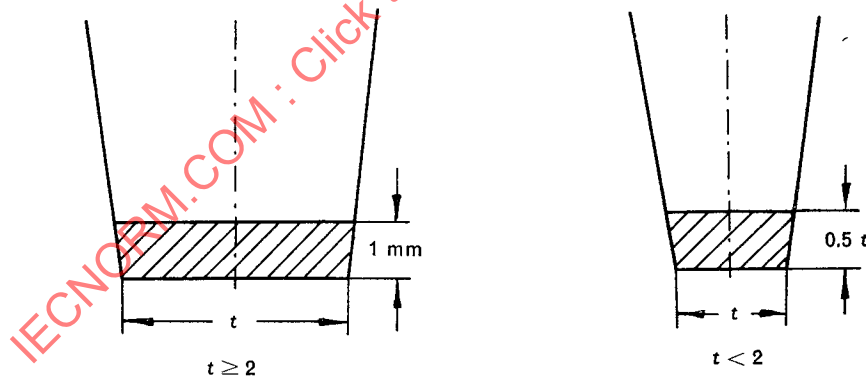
Tolerance on shape of the thin edge.
